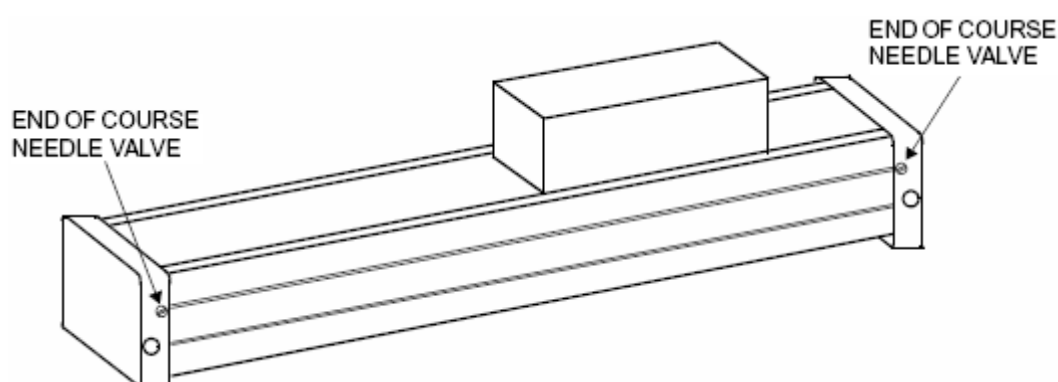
ORIGA Horizontal Cylinder Pneumatic Setting
